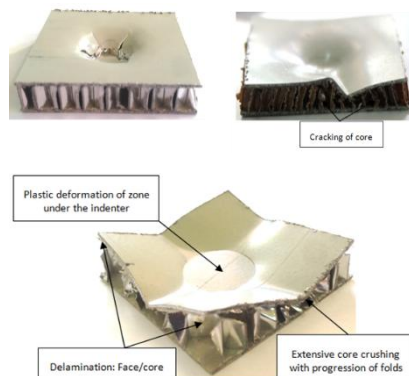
typical failure modes observed during indentation: core crushing and failure of face.
